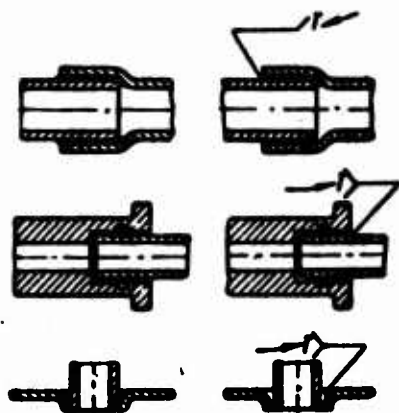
Examples of application of designations on drawings. On the right is shown drawing of joint prior to soldering, on the left — desirable form of joint after soldering. Instructions on technology of soldering process should be placed in spot shown by letter T.
